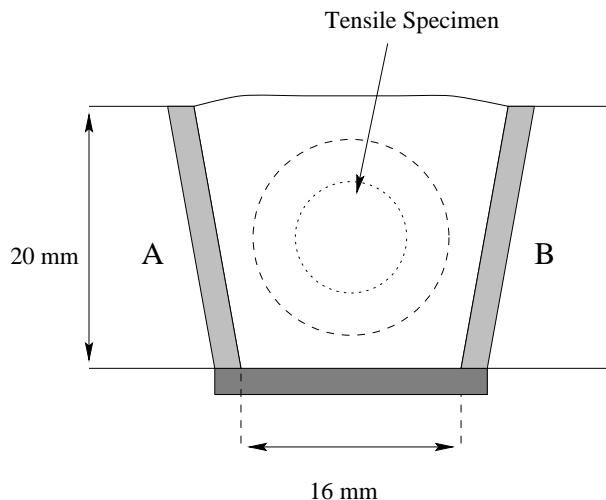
Cross-section of an ISO 2560 weld indicating the position from which tensile test specimens were machined.
